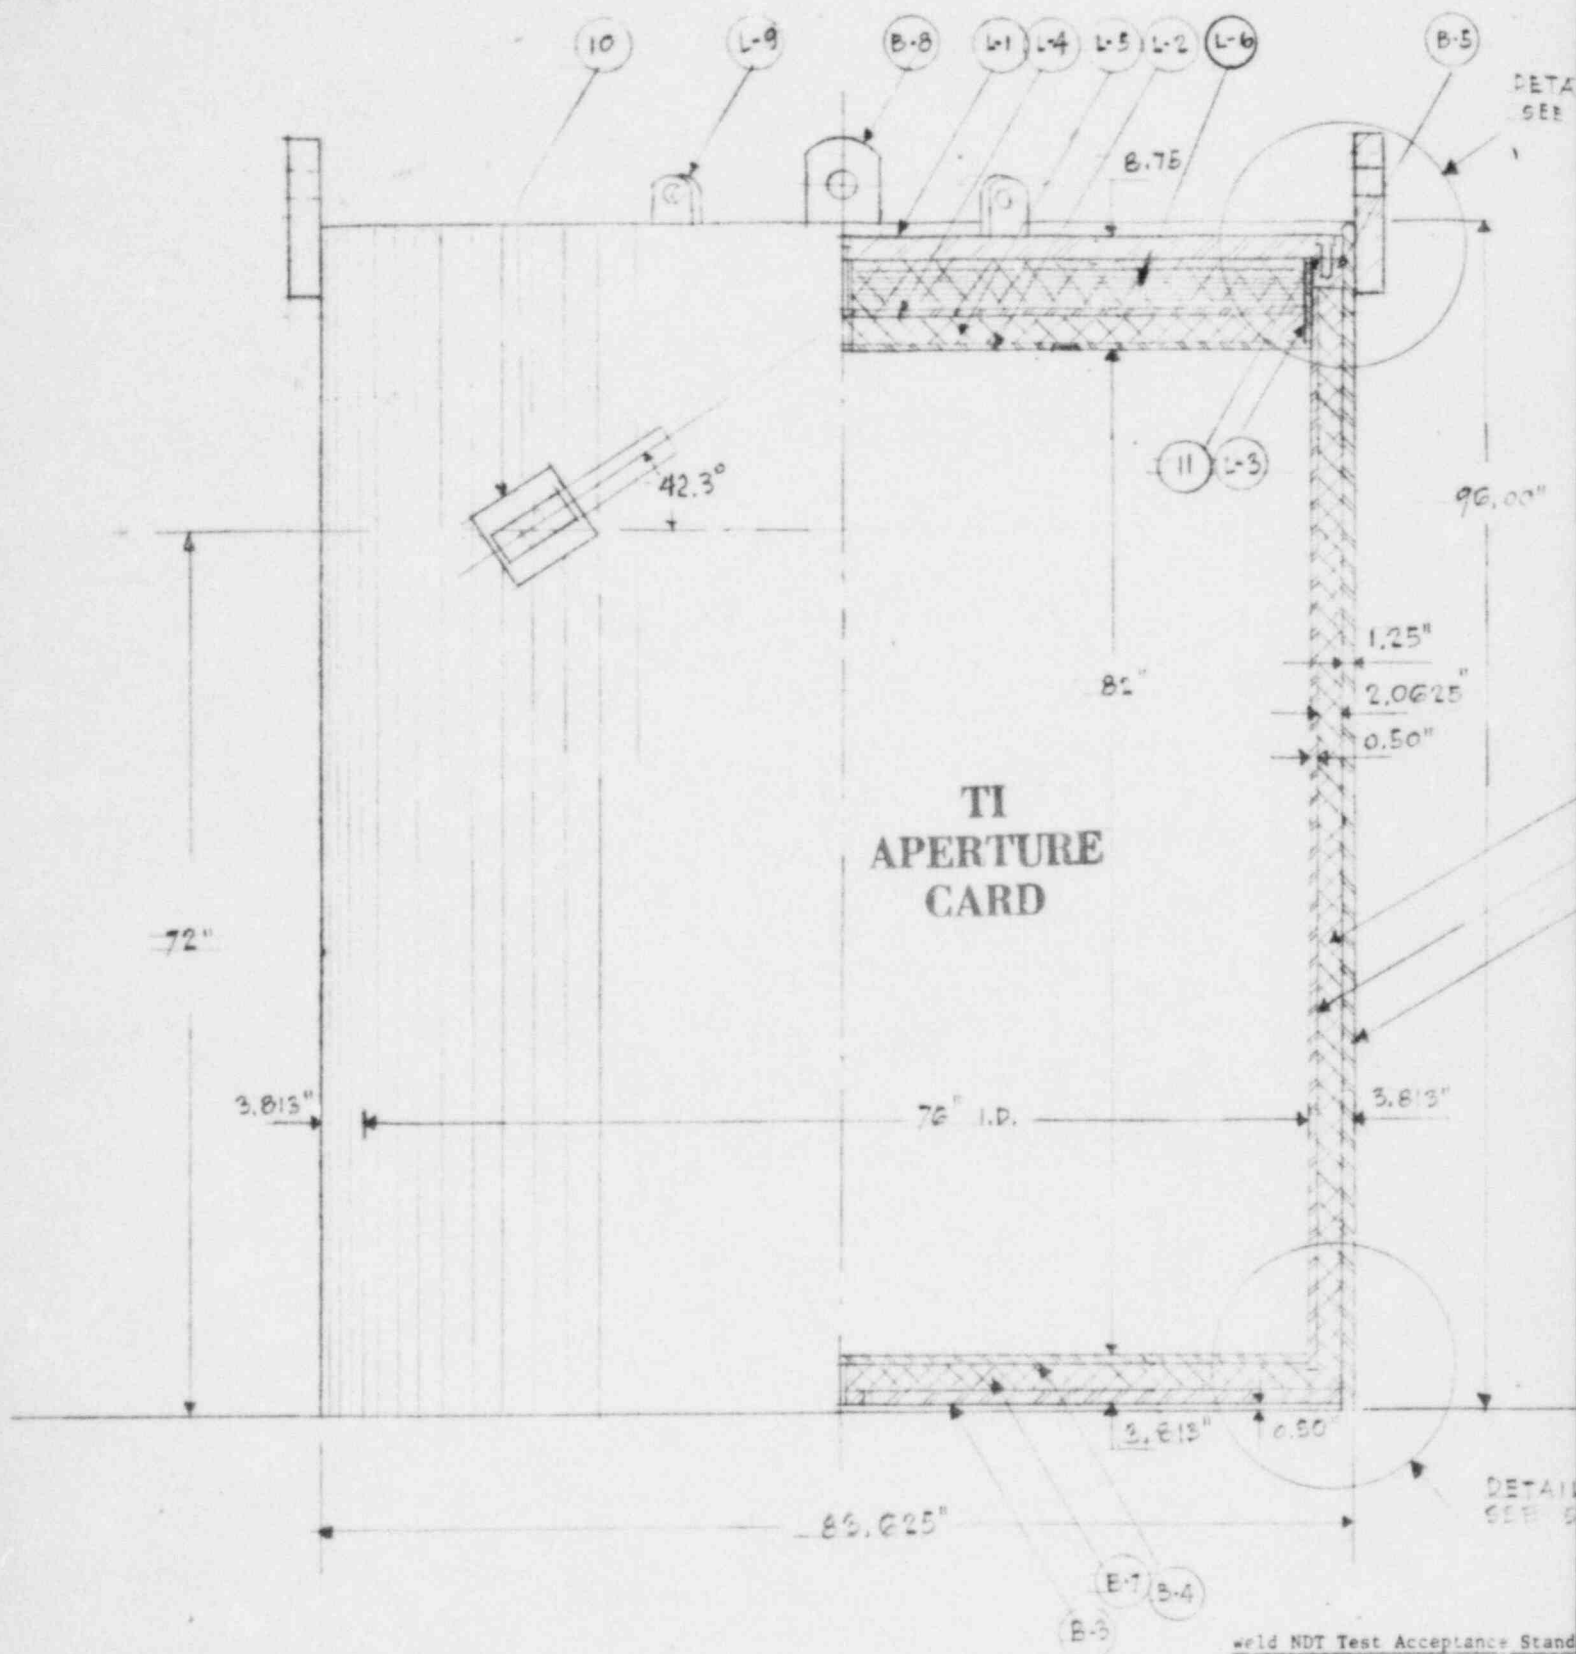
to be fillet welded using multipass string technique using SMAW & SAW processes. Groove design to be double bevel with 52° bends and 1/8" maximum root gap. Weld to be 100% NDT using x-ray.
